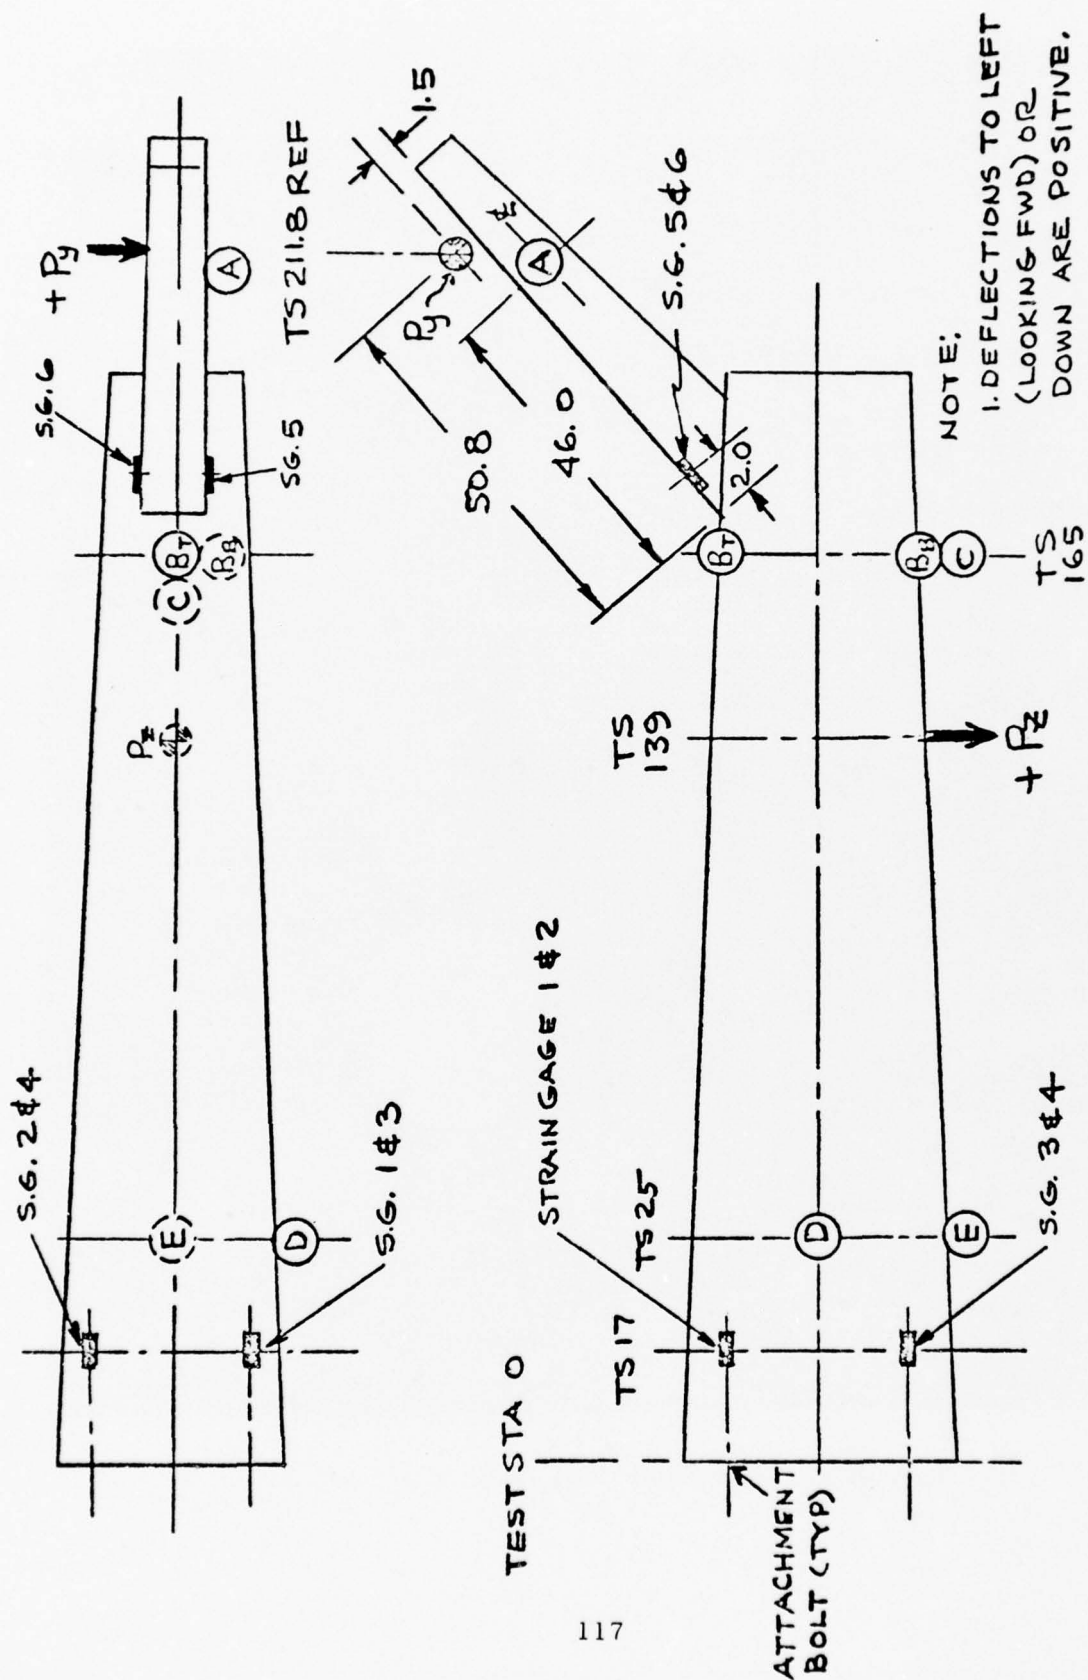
Load Stations and Instrumentation, Tail Boom Specimen "B".
